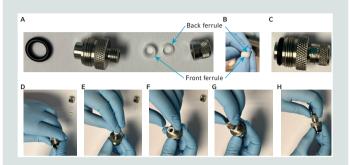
Assembly of a compression fitting.(A) Disassembled parts. (B) The orientation of the front ferrule and back ferrule. (C) The final assembled fitting.(D-H). Steps demonstrating the assembly of a compression fitting.
